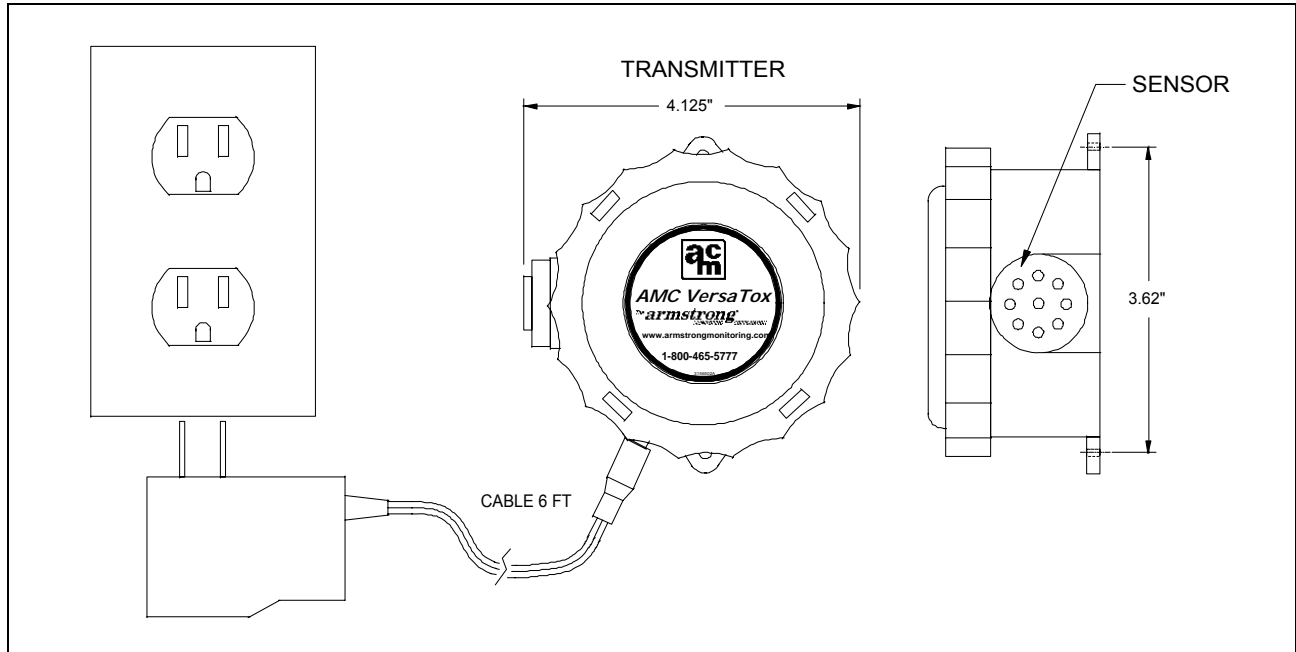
120VAC Power Supply with Buzzer Mounting
